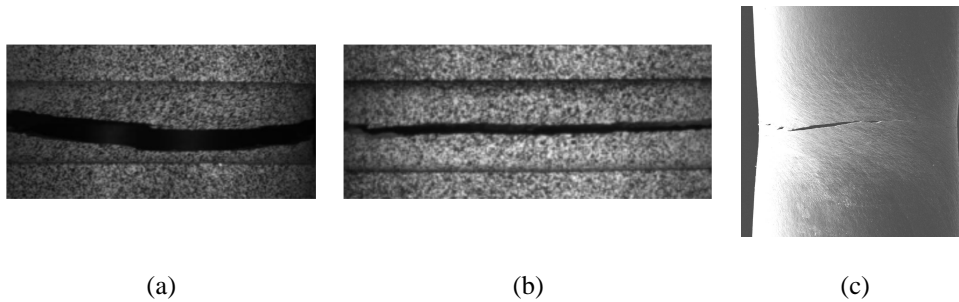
Circumferential view of broken notched specimens for steel notched specimens: (a)  $\beta=0^\circ$  and (c)  $55^\circ$ ; (c) View of broken specimens from the torsion in-situ tests on the steel cylindrical I specimen.
